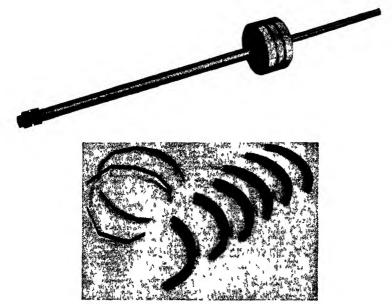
Aluminum piston, carbon rings, and expanders (Courtesy of American Air Compressor Corp.)
